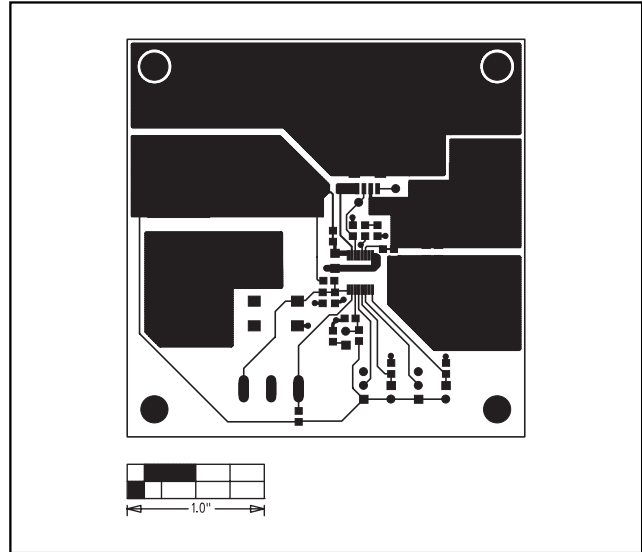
MAX5943A EV Kit PC Board Layout—Component Side
